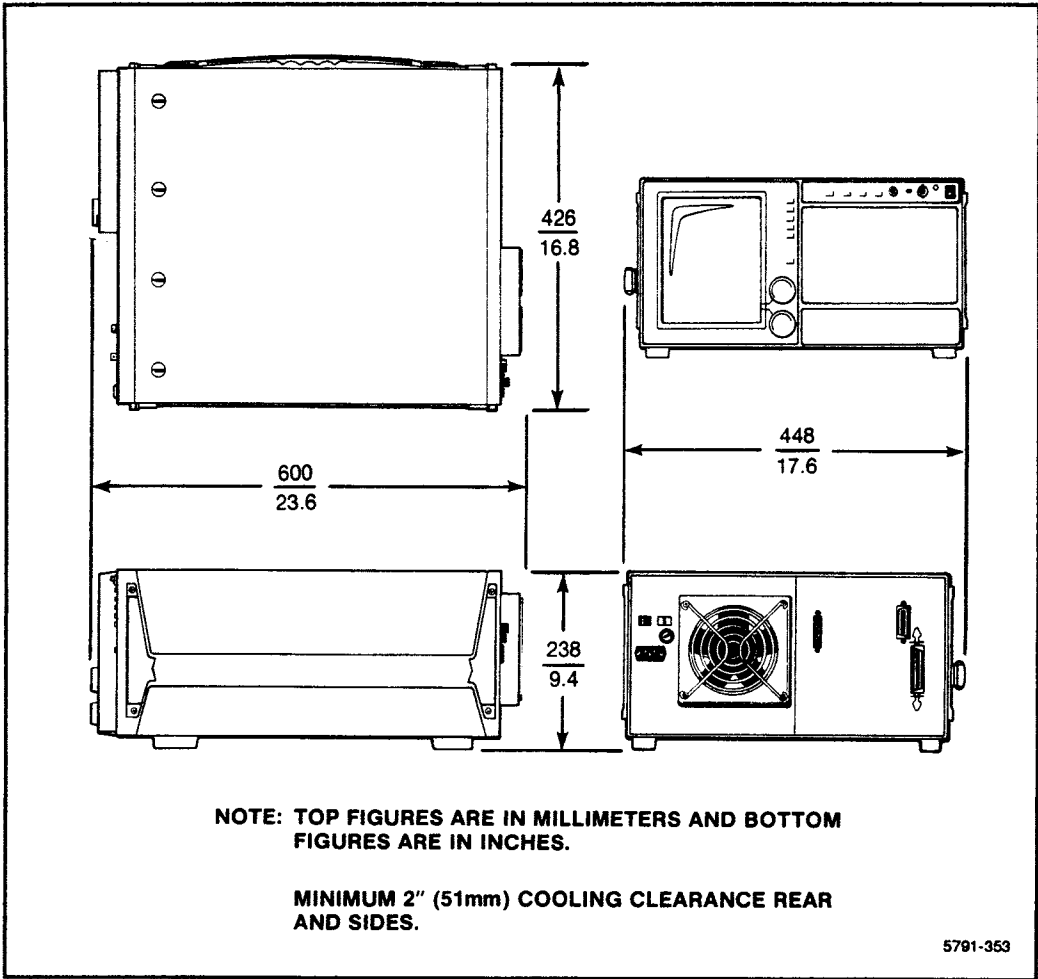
Benchtop 11401/11402 dimensional drawing.
